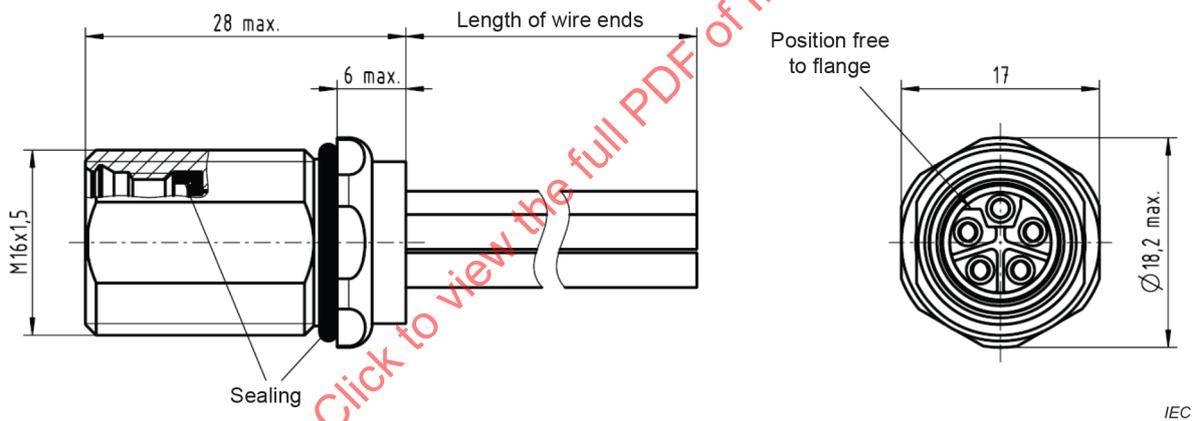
Fixed connector, female contacts, mounting with thread M12 × 1 and inner push-pull locking, with wire ends, single hole front mounting thread M16 × 1,5 and mounting orientation
